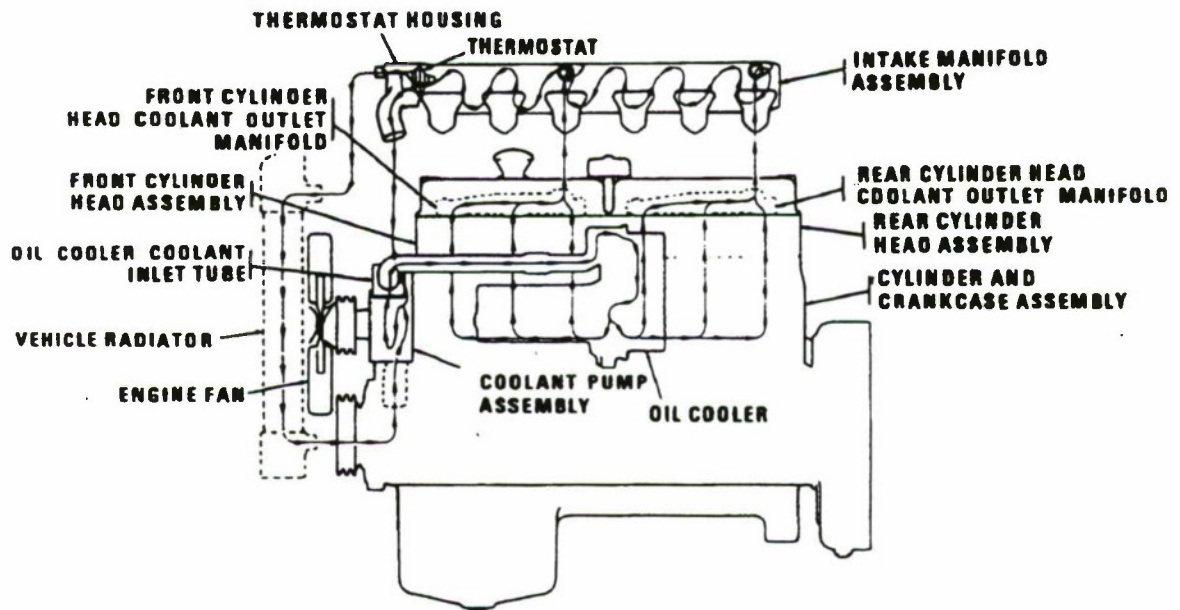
Circulation of Coolant in Engine Coolant Jacket (Ref. 12)
